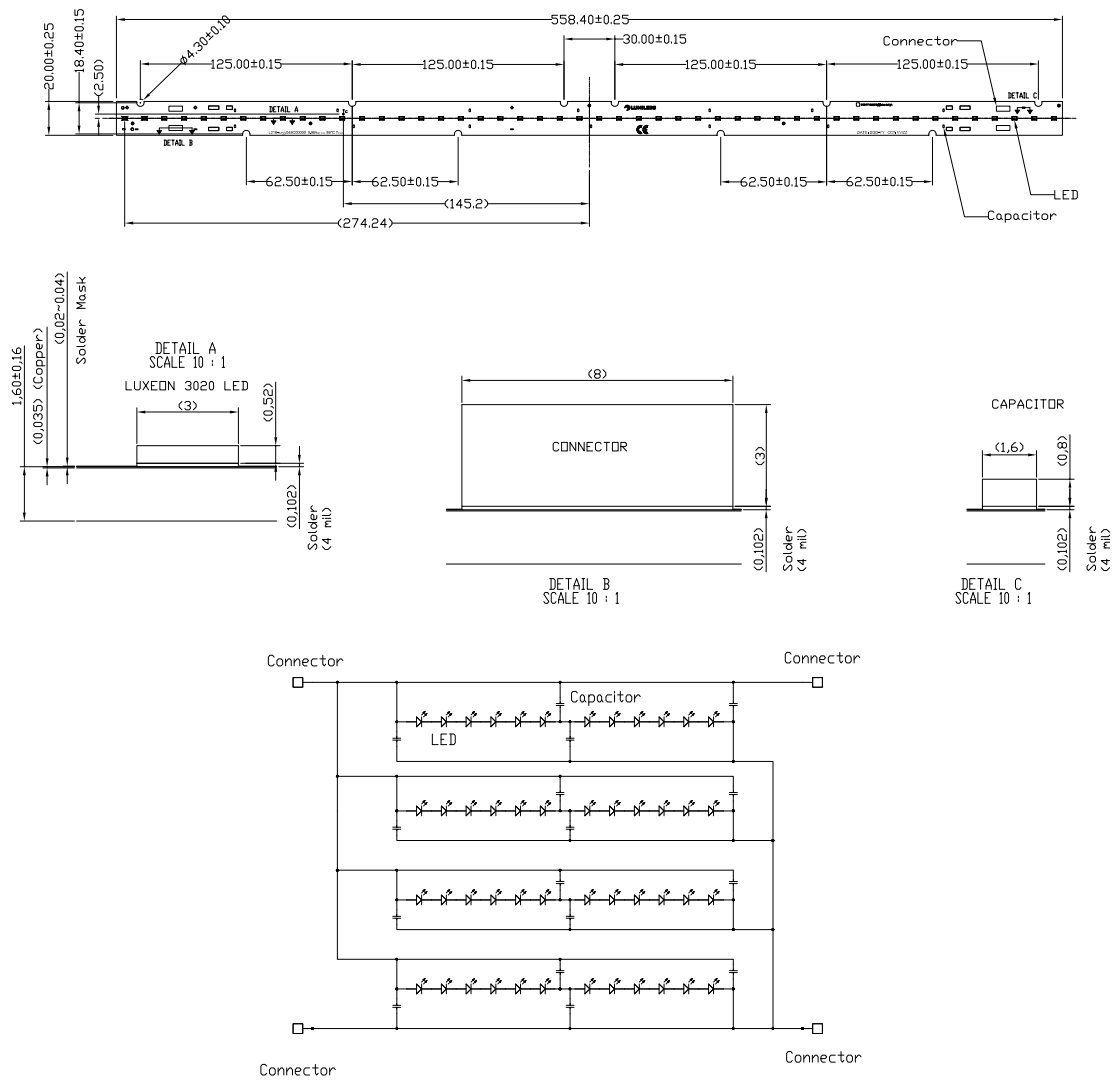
Mechanical dimensions for L218-xxxx048C00000.
